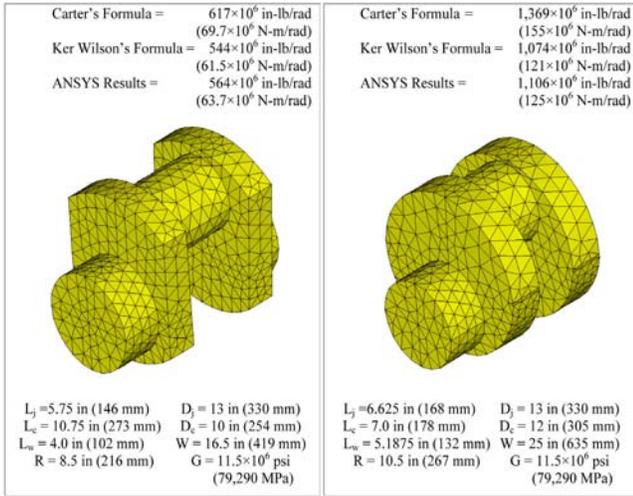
Finite Element Models Used to Calculate Torsional Stiffness of Crankshaft Sections.
